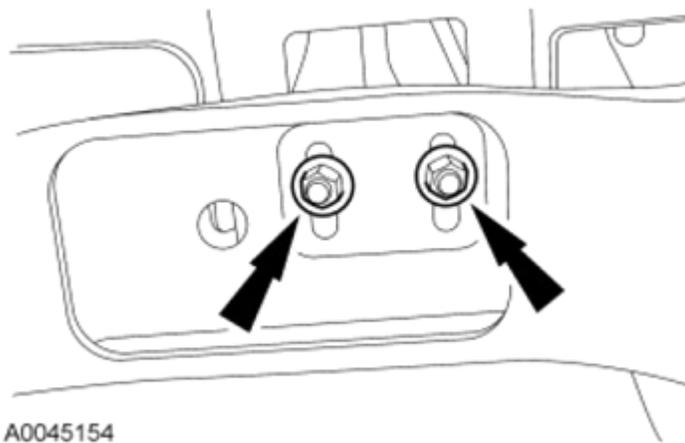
Locating Transmission Mount-To-Crossmember Nuts
